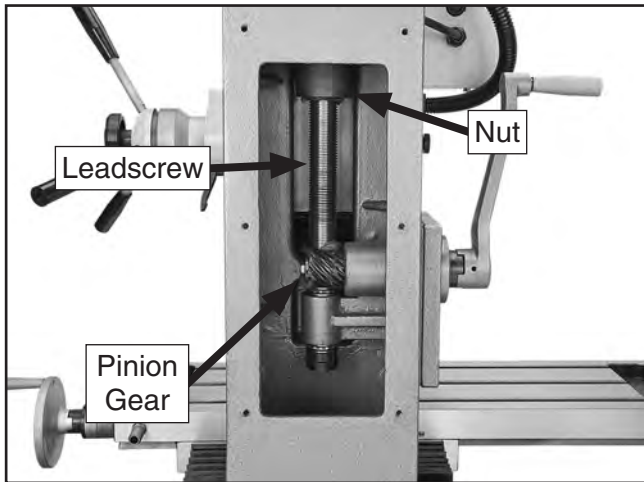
Column rear cover removed to access Z-axis leadscrew components.
